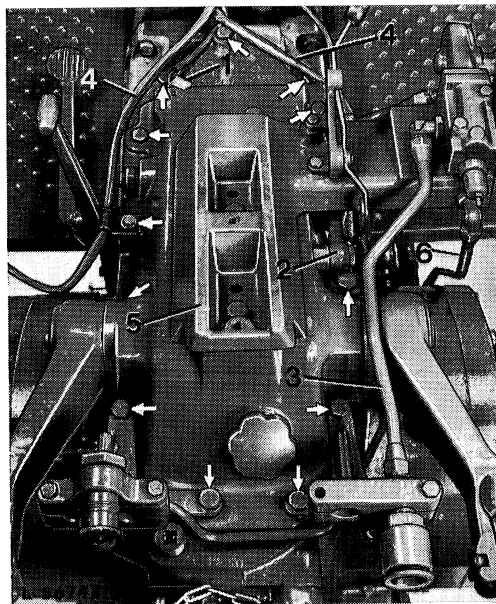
Rockshaft, Installed (Earlier Model Shown)
